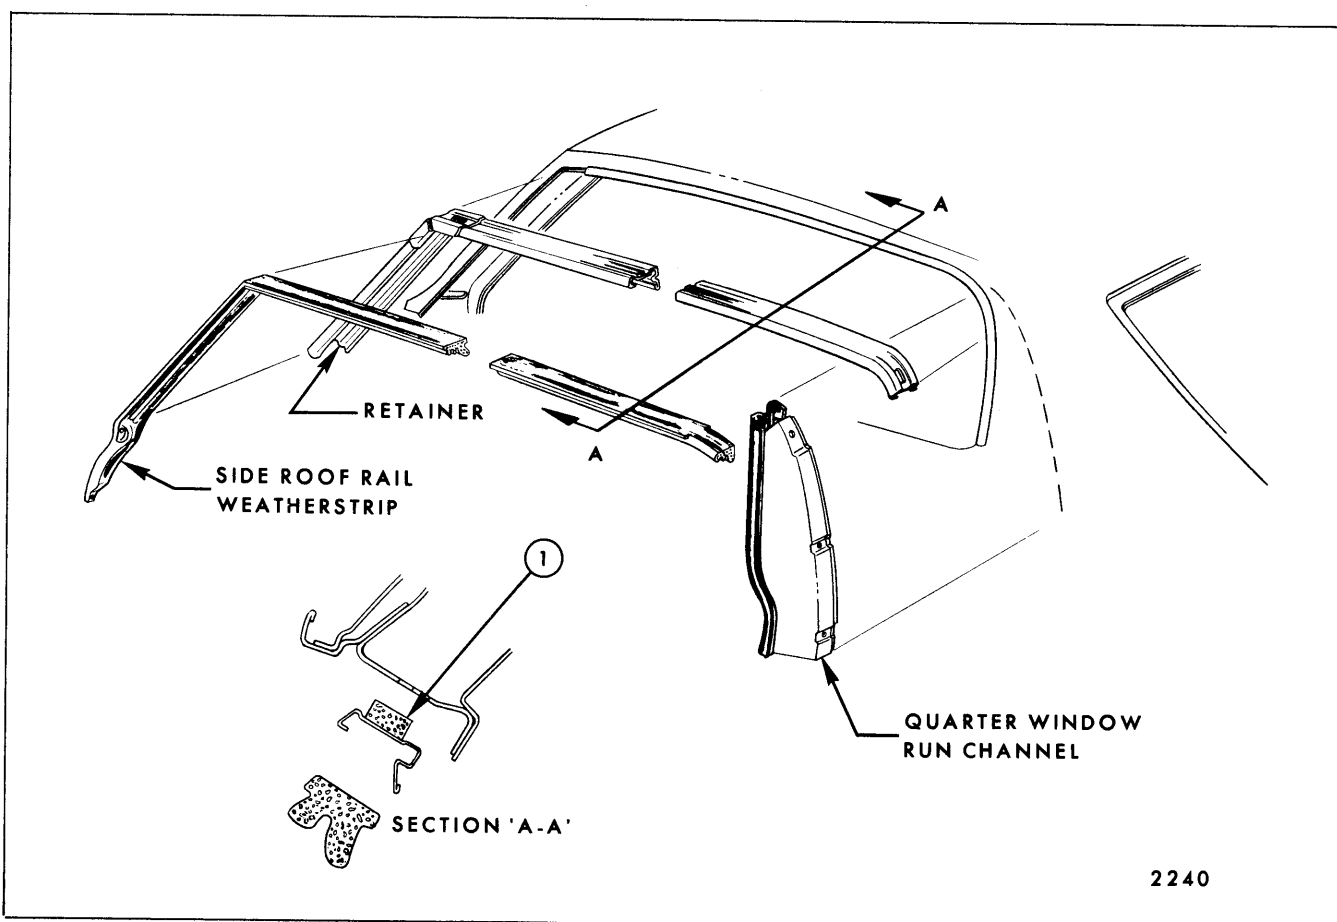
Side Roof Rail Weatherstrip and Retainer "B & C-47" Styles
